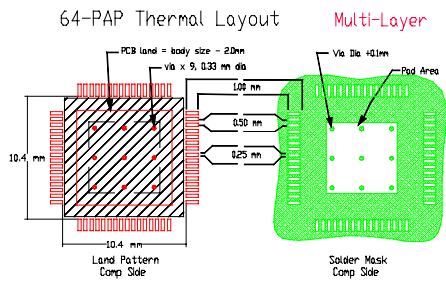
The PCB layout for a 64 pin PowerPAD™ TQFP package is shown indicating the thermal vias required in the board construction, and the approximate thermal land size with respect to the package body size.
